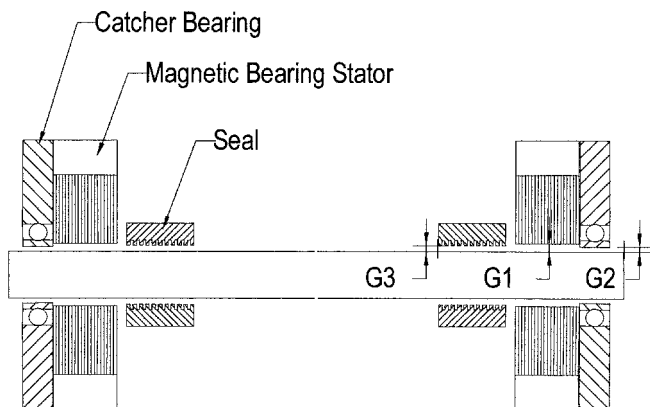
Clearance arrangement: Seal ring clearance G3 is greater than catcher-bearing clearance G2, but is less than magnetic-bearing clearance G1.
